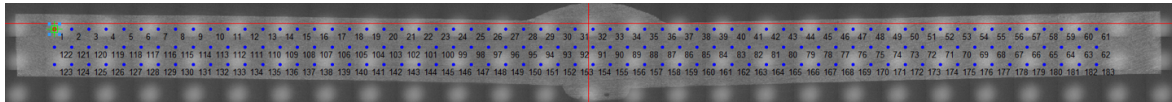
Imprint pattern for the hardness measurements of the welded samples.
